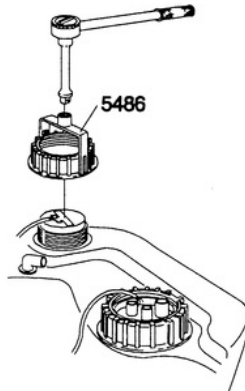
Using a socket wrench and tool 999-5486 or equivalent, remove the retaining ring and lift the sending unit out of the tank
